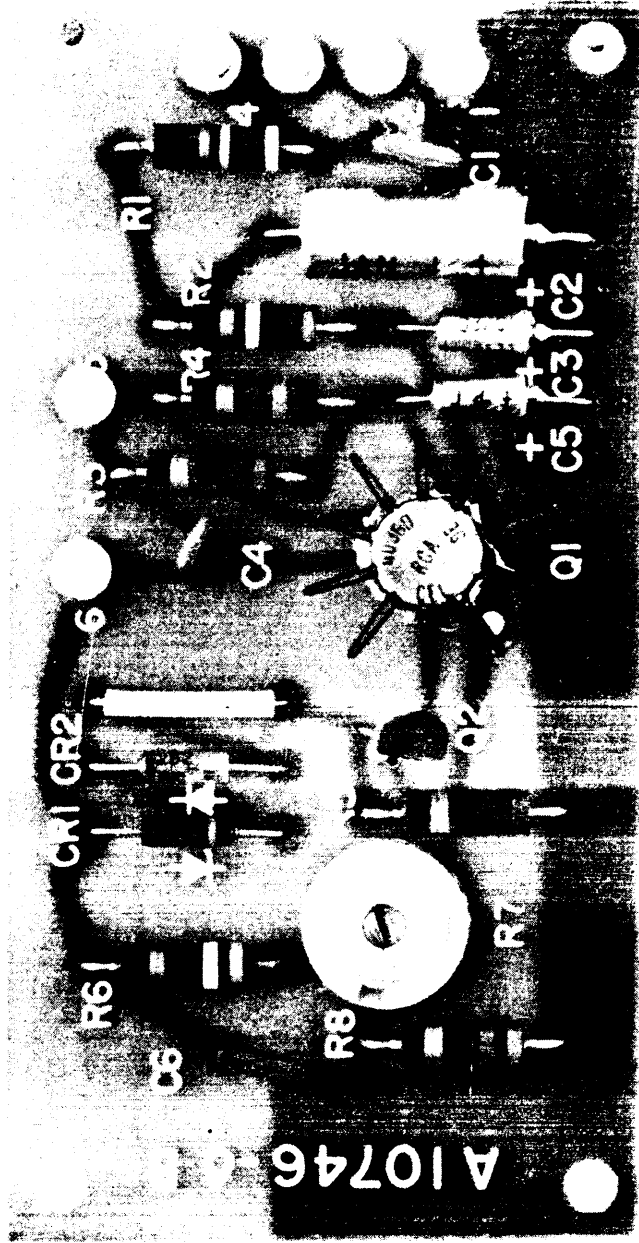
Power Supply (Regulator) Assembly 1A1
